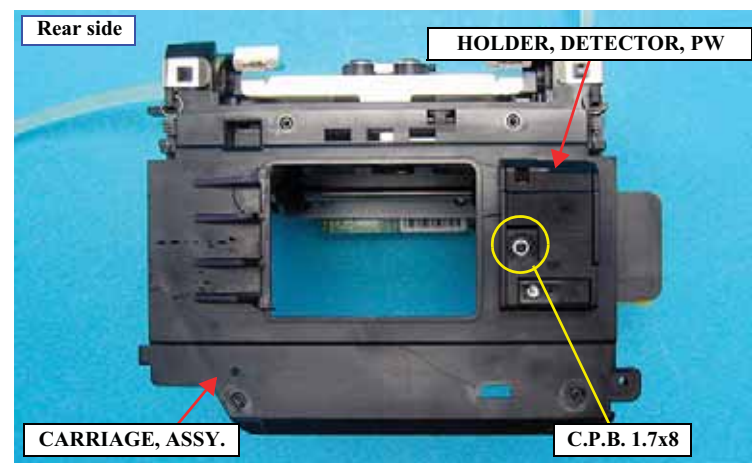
Removing the HOLDER, DETECTOR, PW
